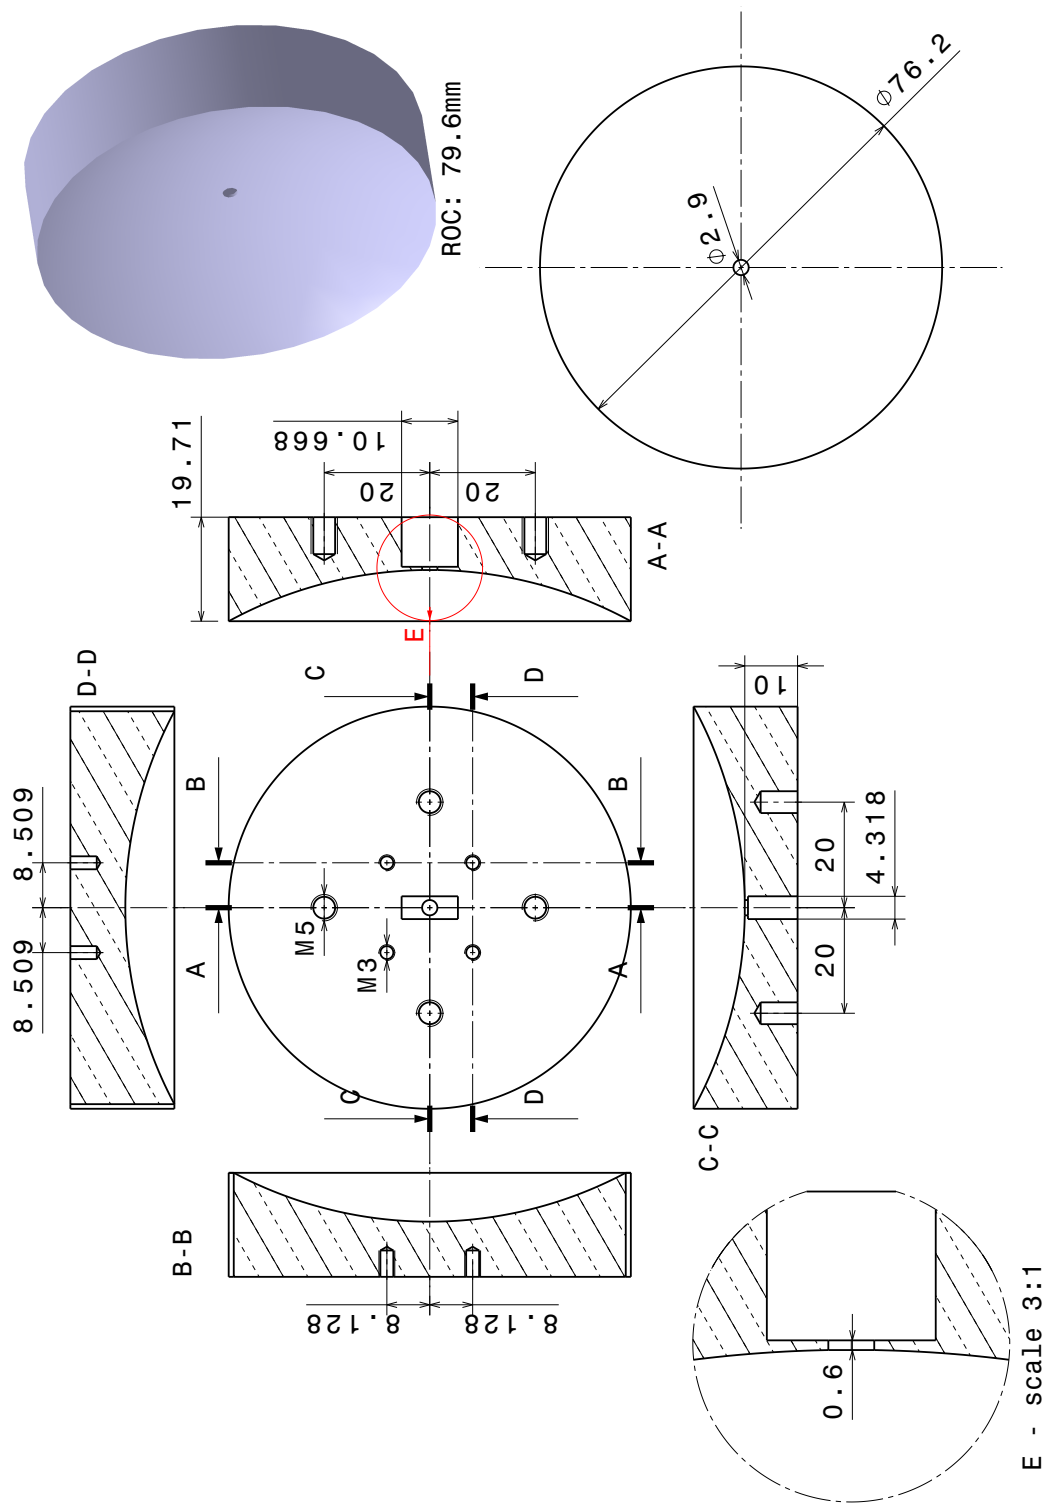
Technical drawing of confocal mirror (coupling side, non-cryogenic)
